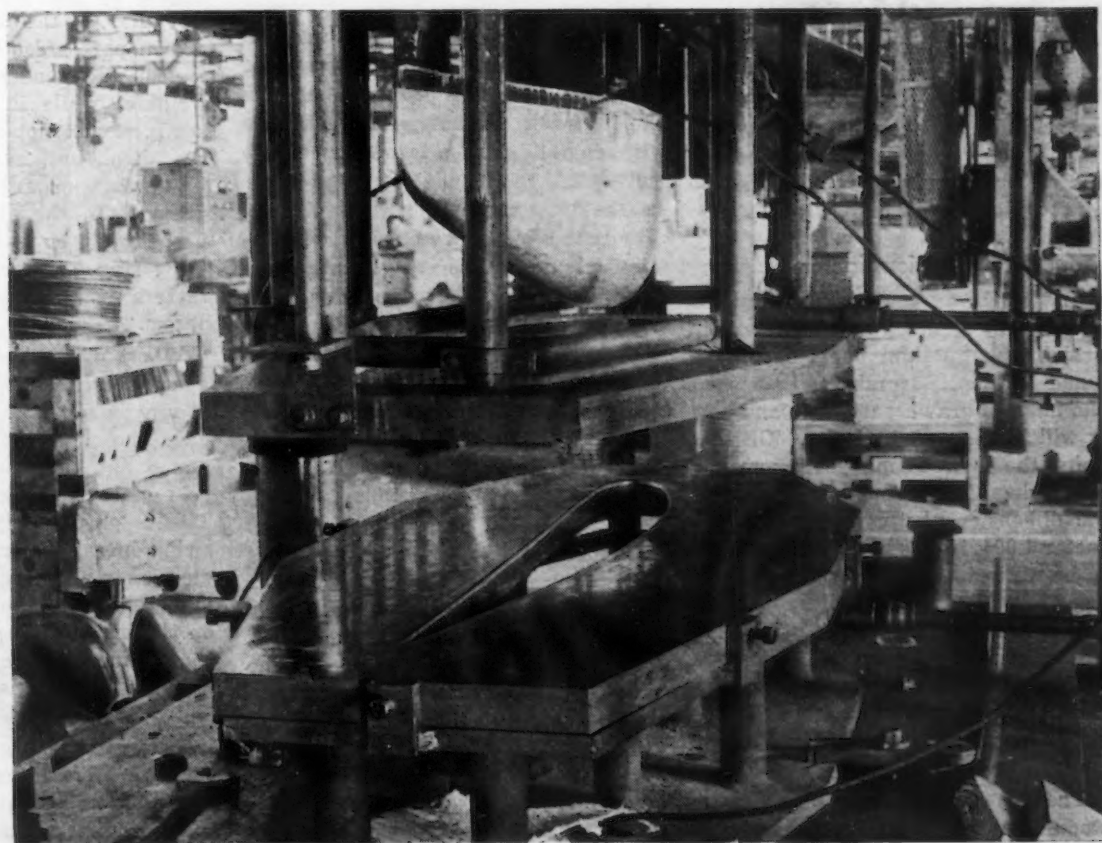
Gas heated dies for forming wing tips in one draw. Note elevation of gas burner ring above the draw ring and below the punch member.
